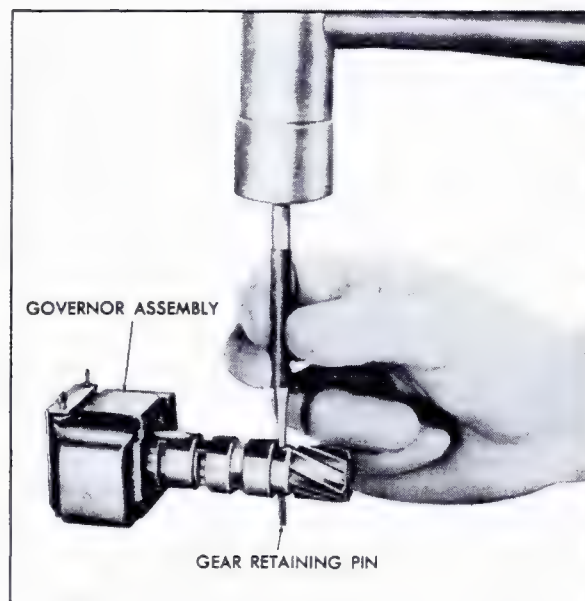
Removing Governor Driven Gear Retaining Pin
